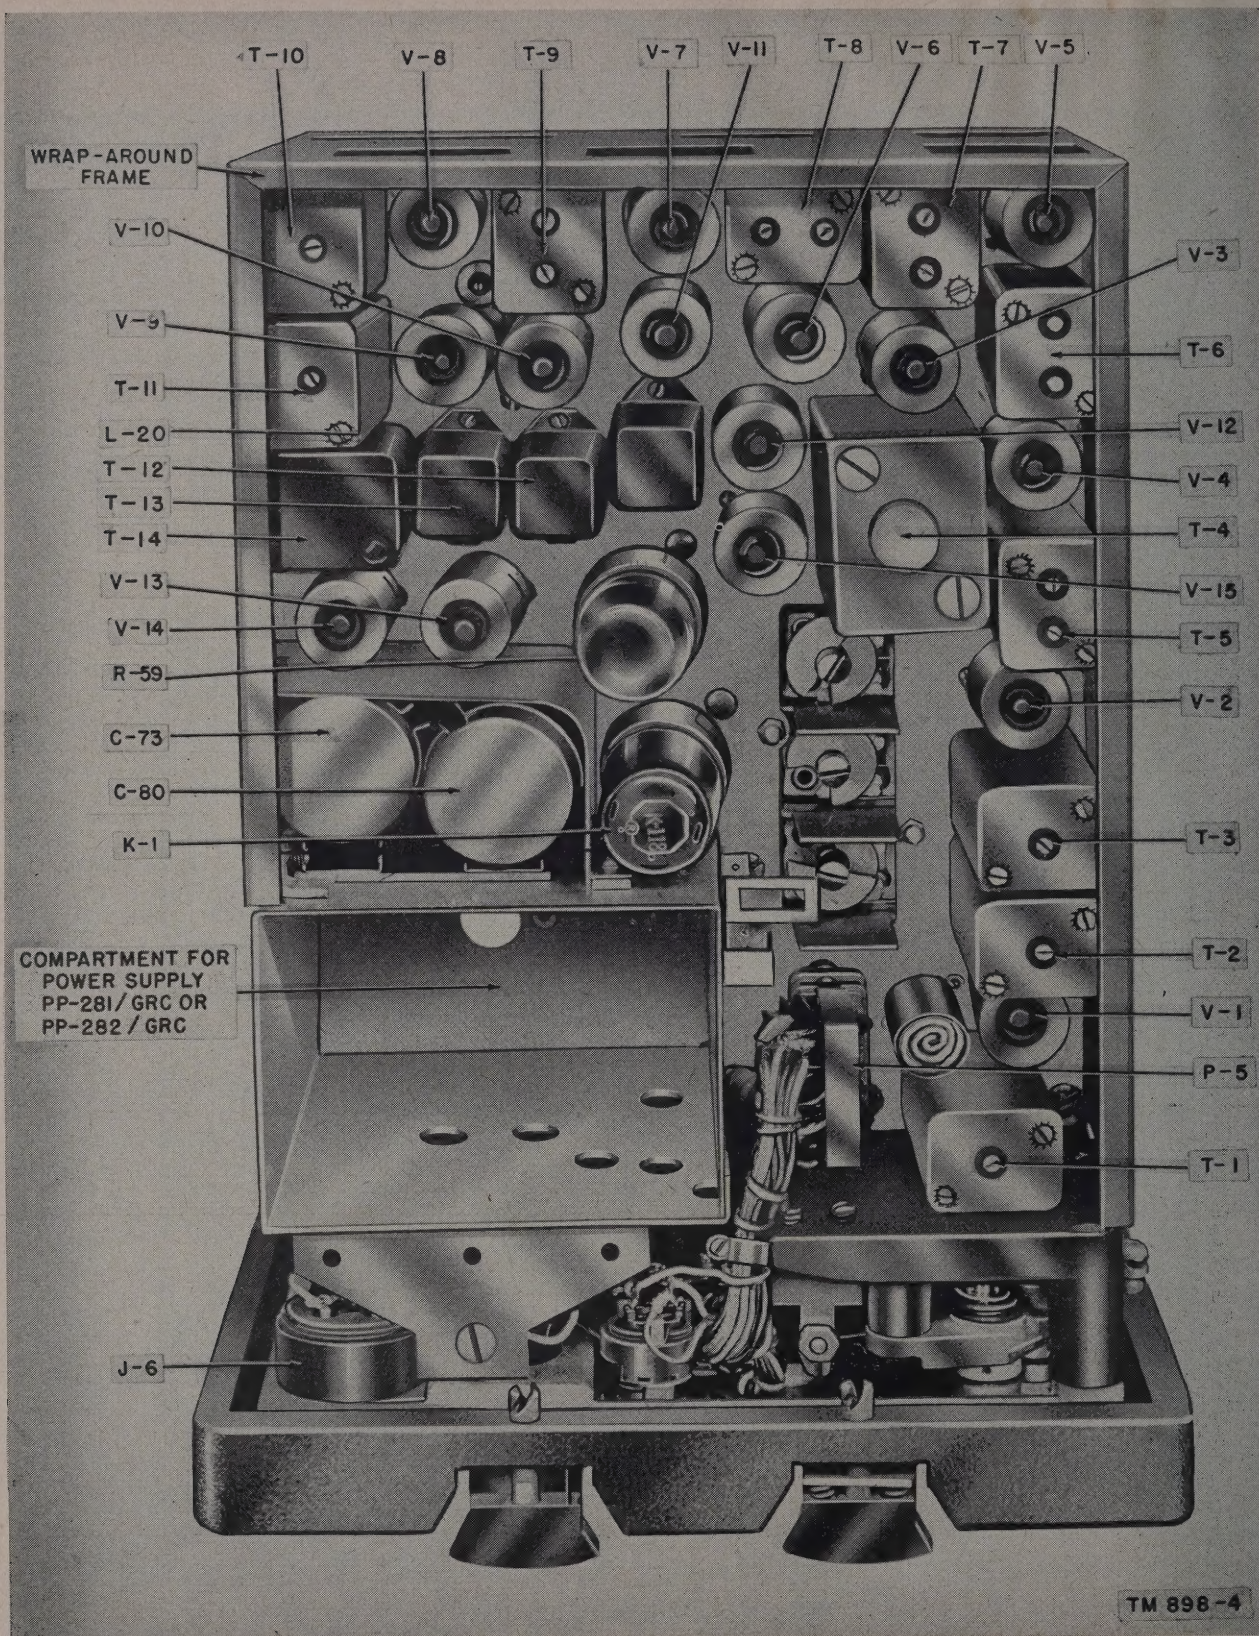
Auxiliary receiver panel-chassis assembly, top view.
